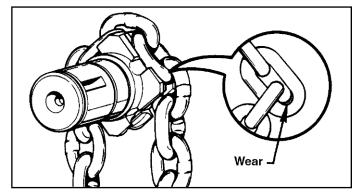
Check Chain Wear at Bearing Surfaces Between Links
